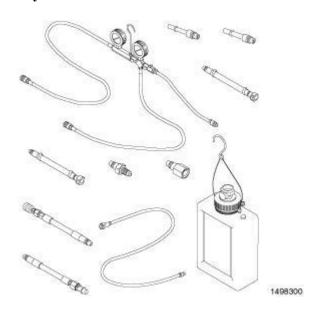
DECAY TOOL, FUEL - 8978A Courtesy of CHRYSLER LLC
